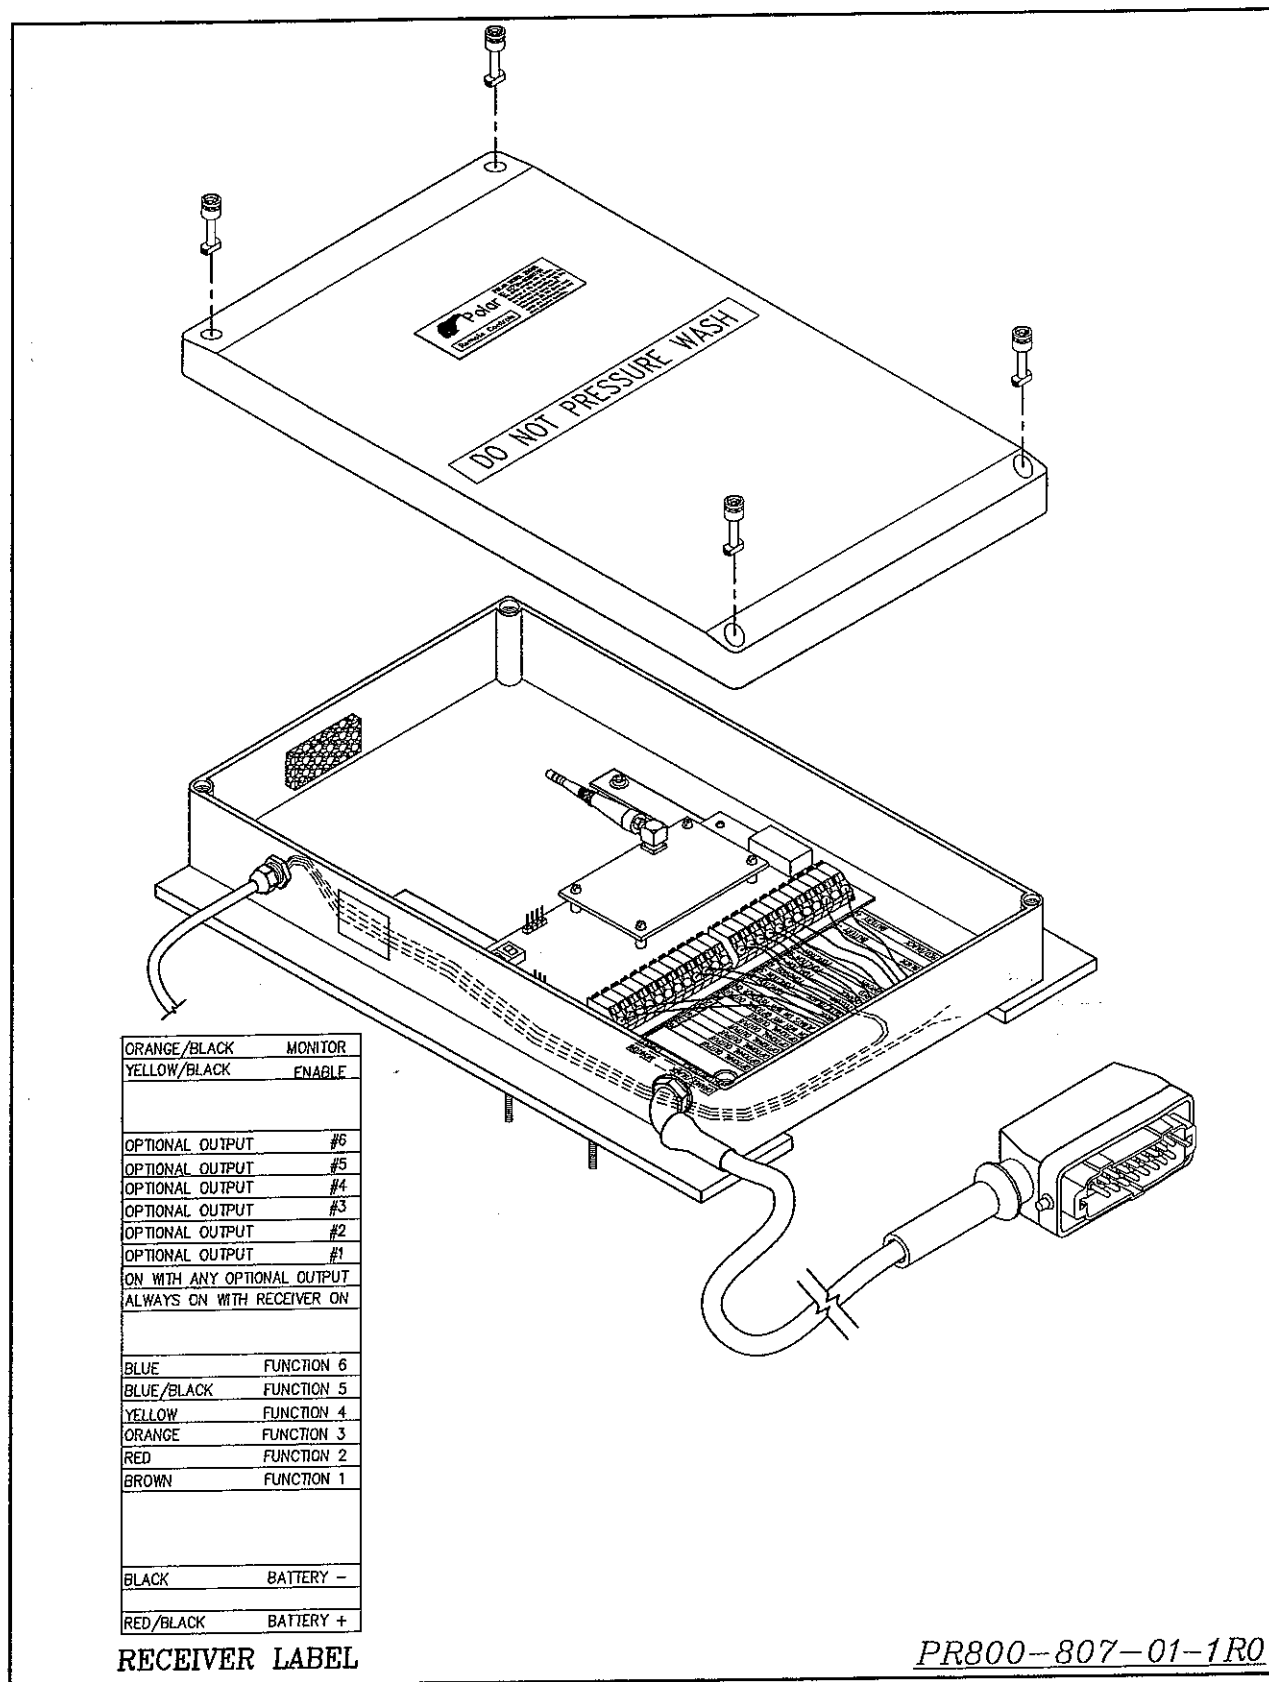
Shows the Radio Receiver connector strip with control cable wires Identified by colour code.
